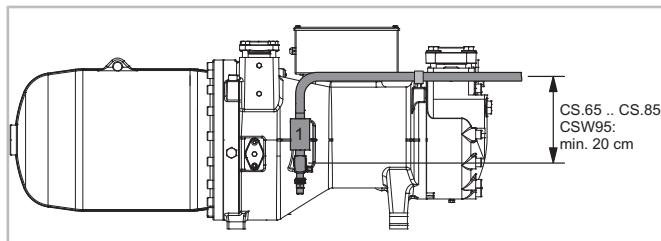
Pipe layout of the ECO suction gas line at the compressor
